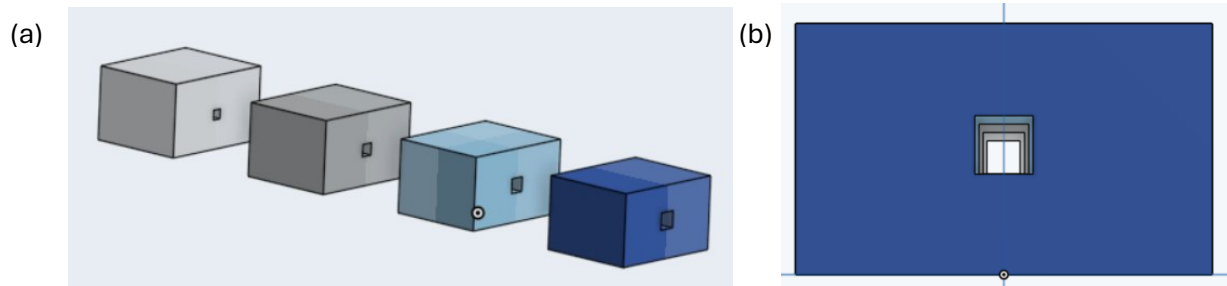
1 – 3D model of the four printed cubes, general view (a) and frontal view (b)
